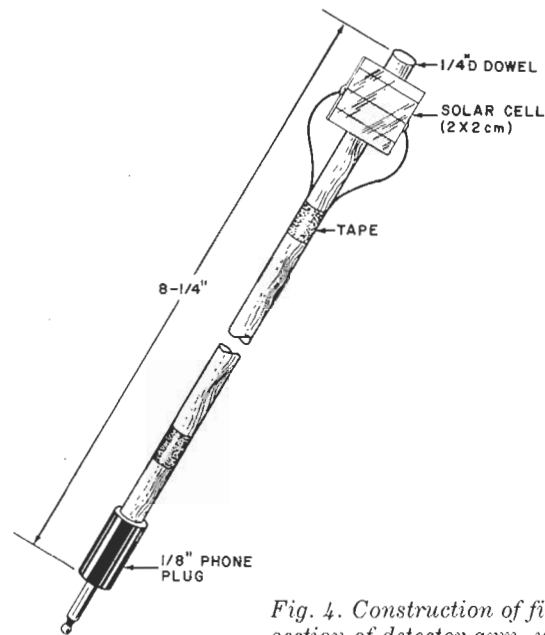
Construction of final section of detector arm, which is folded to permit door closing.
